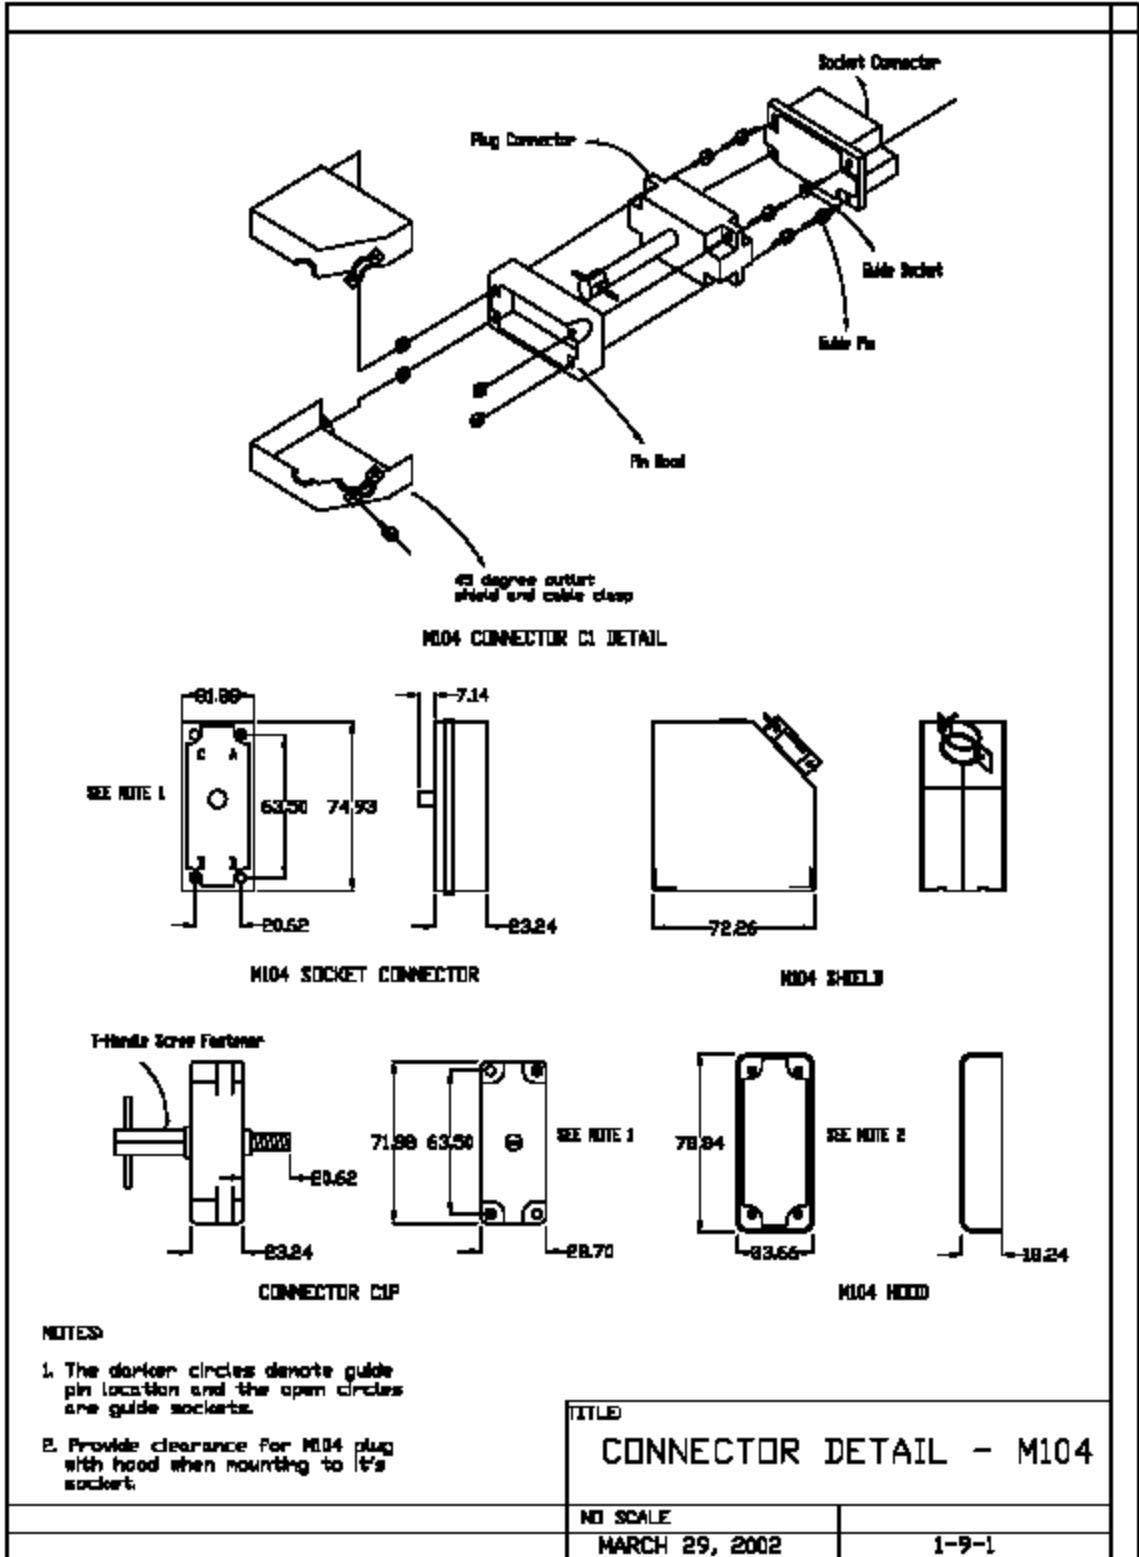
TEES DRAWING 1-9-1, CONNECTOR DETAIL - M104
